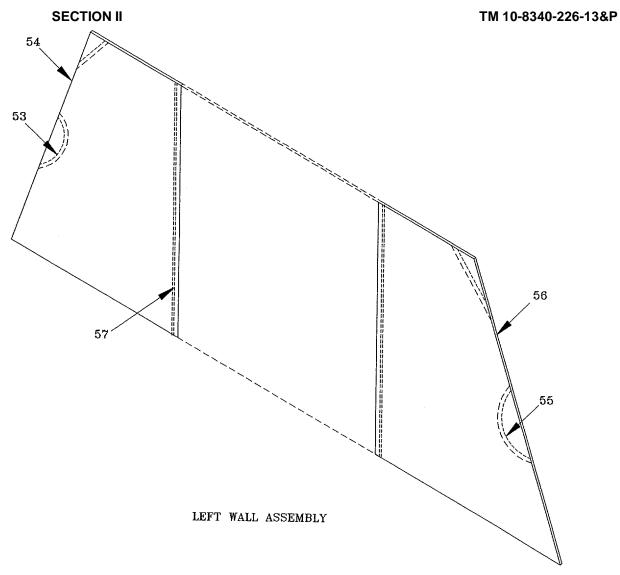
TENT BODY ASSEMBLY (Sheet 6 of 10)
